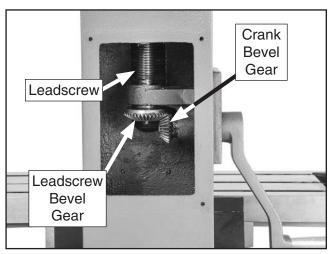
Column rear cover removed to access headstock elevation leadscrew and bevel gears.
